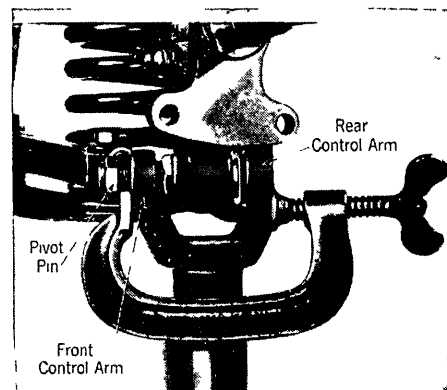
Using "C" clamp to line up threads on lower pivot pin and rear control arm. 1939-48
